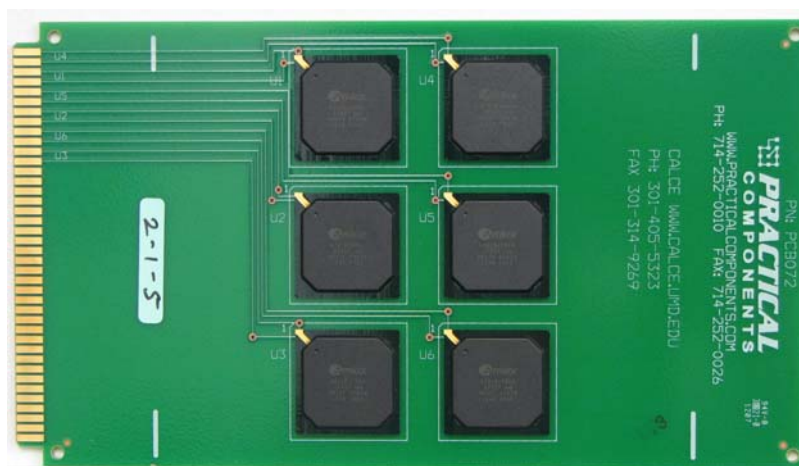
Test vehicle with 6 BGAs on each PCB (Board dimensions: 8 in. (203.2 mm)  $\times$  4.5 in. [114.3 mm]  $\times$  93 mils [2.36 mm])
